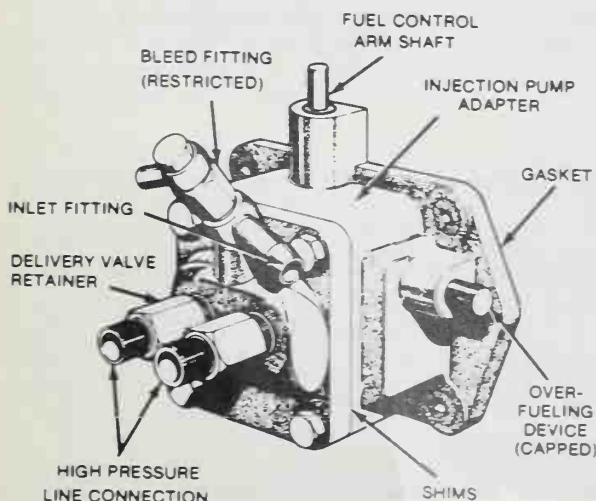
View showing Bryce or Kiki fuel injection pump used on later Model DJE.
